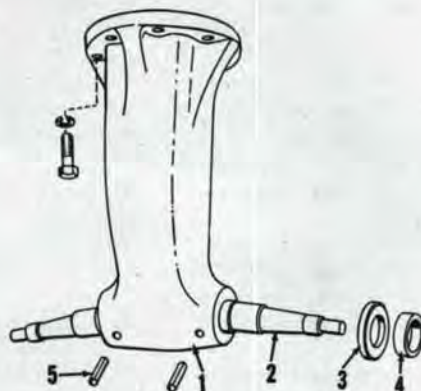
Dual wheel tricycle spindles (2) can be removed after removing groove pins (5).
